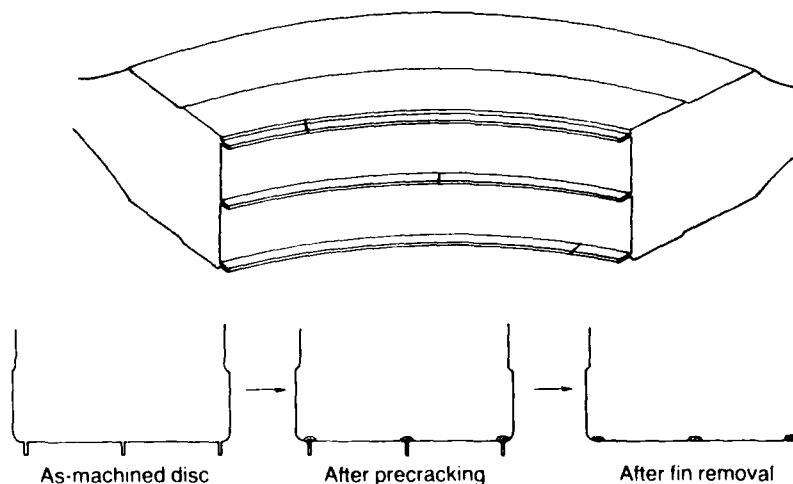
ROLLS-ROYCE DISC BORE FIN CRACK TESTPIECE
